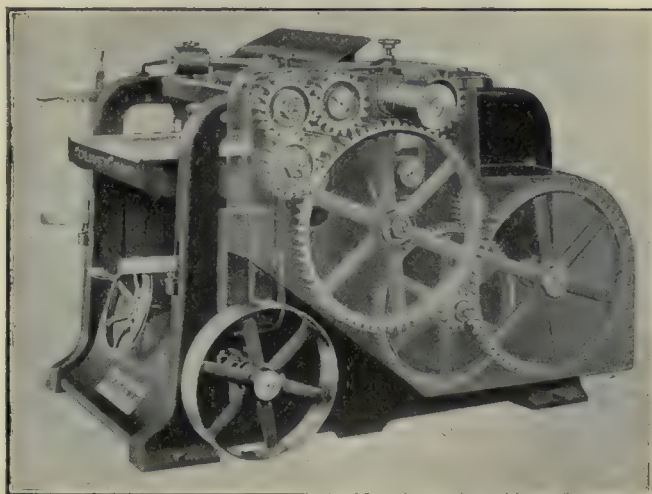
OLIVER NO. 61 CABINET SURFACING MACHINE
